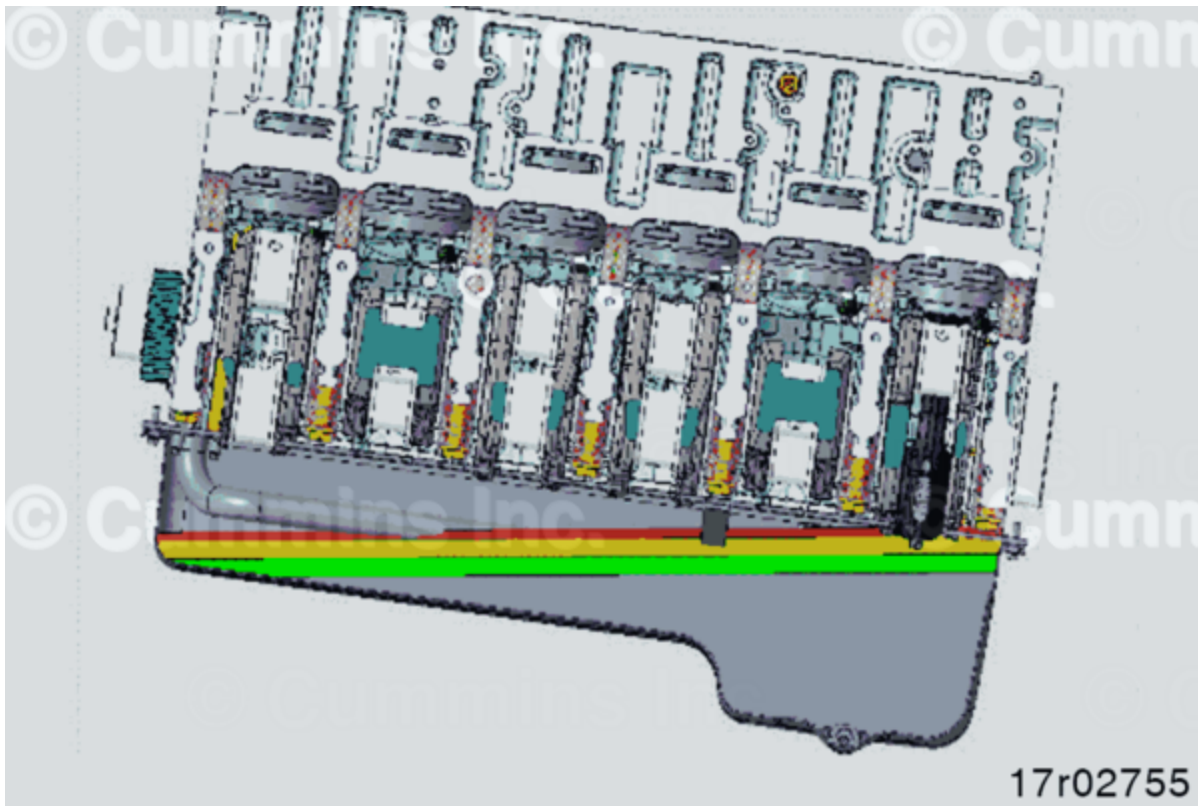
, Cross-sectional view showing rear connecting rod interaction with the oil sump when the lubricating oil level exceeds specification.
